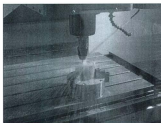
Drilling the rod mounting positions in the reference base blank.
